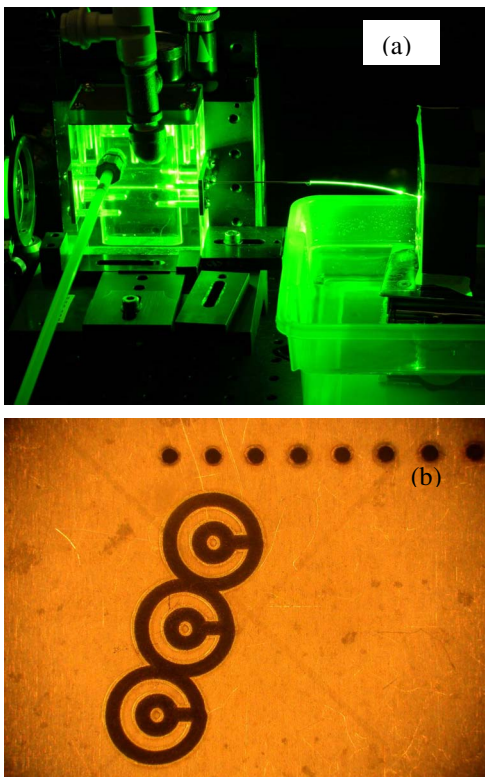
(a) Liquid Core Fiber can bend and machine efficiently; (b) Features machined on SS304.
